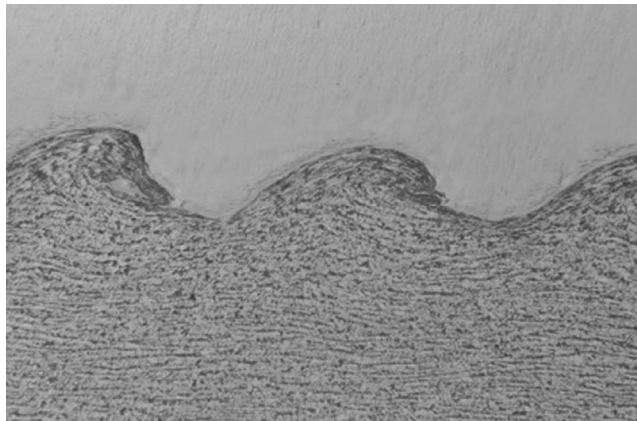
Photomicrograph of a typical explosion weld. (Courtesy of Dynamic Materials Corporation, CO.)
